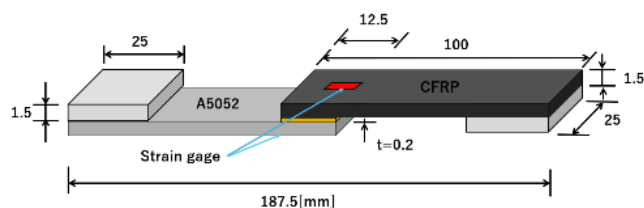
Schematic diagram of a single-lap joint (SLJ) specimen
